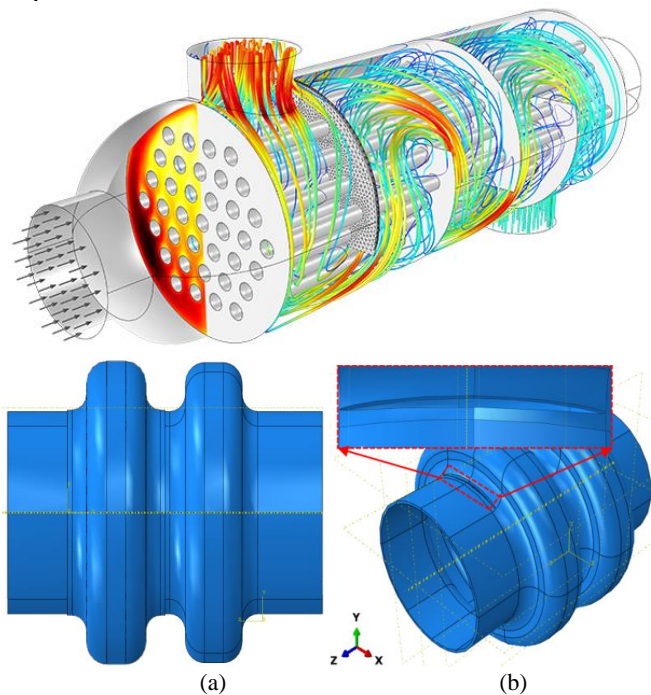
Expansion joint: a) without defect; b) with defect.
